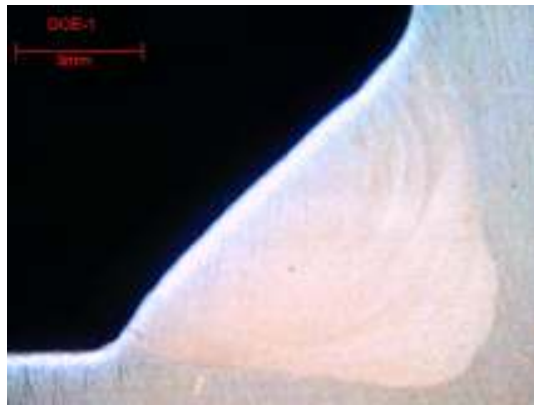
Macroscopic Image of Weld Cross Section
